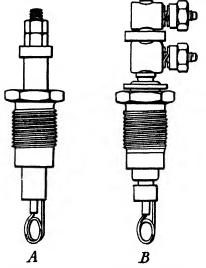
TYPICAL ELECTRIC HEATING PLUGS USED FOR STARTING PURPOSES
